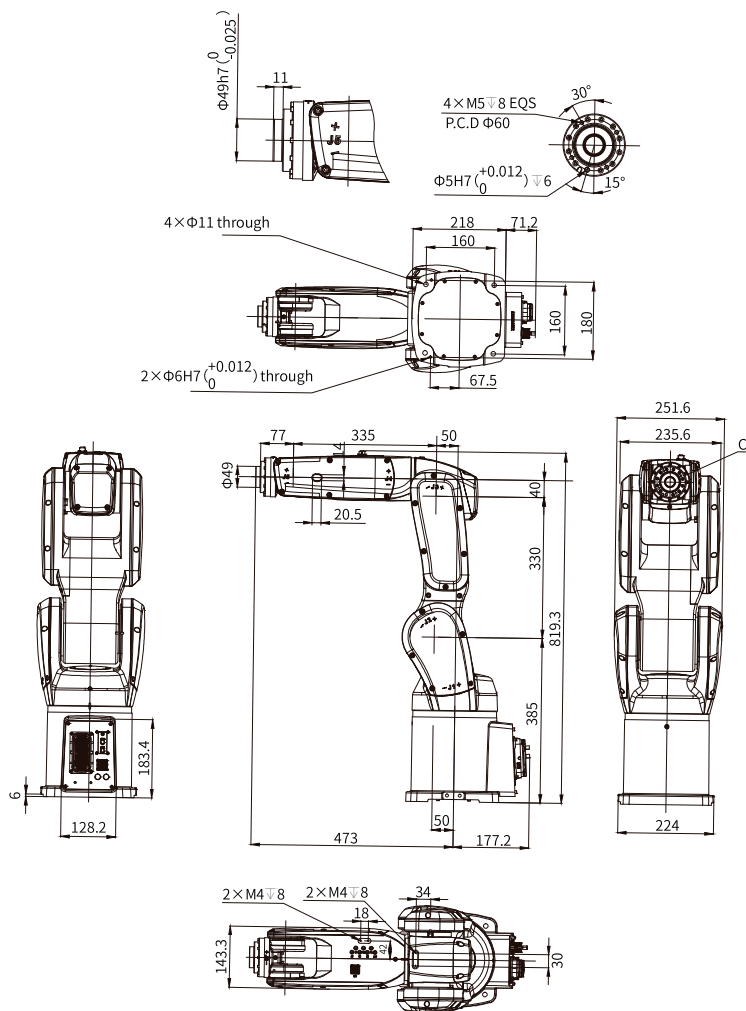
Outline dimensions for IRS311-7-70TS-INT (unit: mm)
